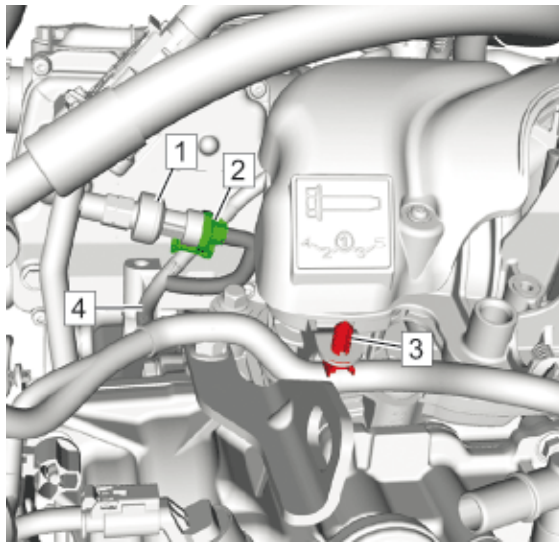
A/C High Pressure Cutoff Switch, Electrical Connector, Retainer And Engine Wiring Harness
